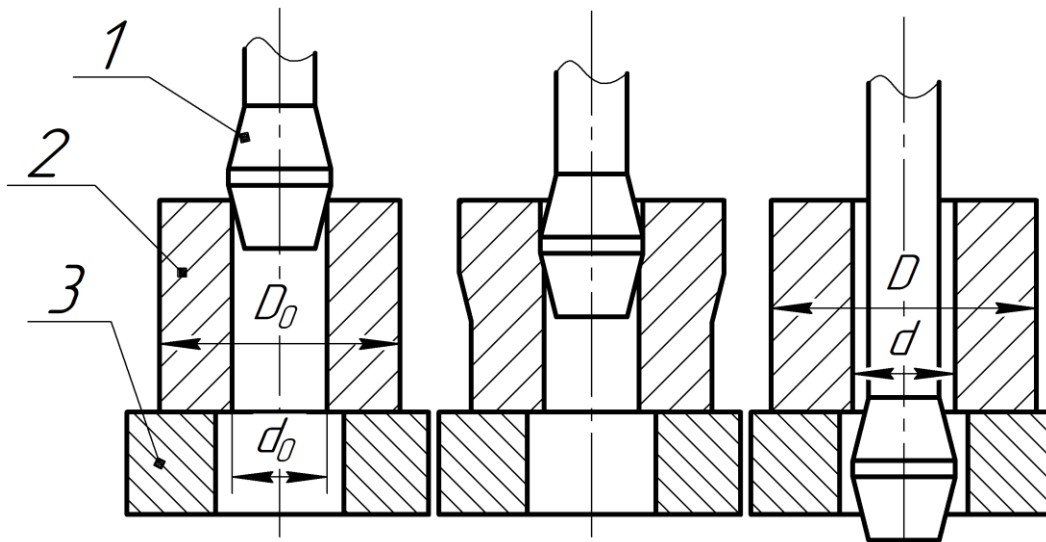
Diagram of the process of cold expansion a hole with a support (1 — Dorn; 2—work piece; 3 — Support plane; d_0 — inner diameter of the workpiece; D_0 — outer diameter of the workpiece; d — inner diameter of the workpiece after cold expansion; D — outer diameter of the workpiece after cold expansion)
